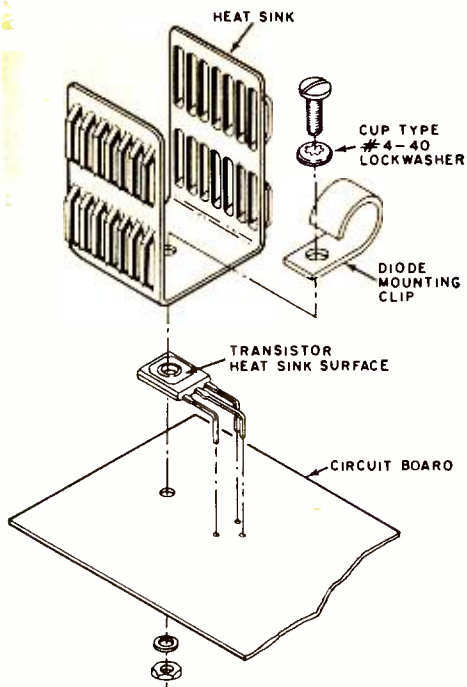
Method of installing each power transistor, heat sink, and diode mounting clamp. The cup-shaped lock washer is necessary to prevent cracking the power transistor when it gets hot after long use.
